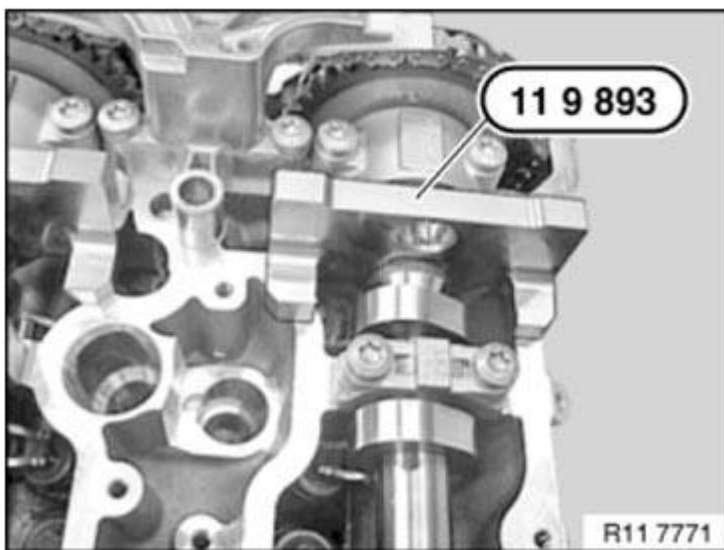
Identifying Special Tool 11 9 893 On Intake Camshaft
